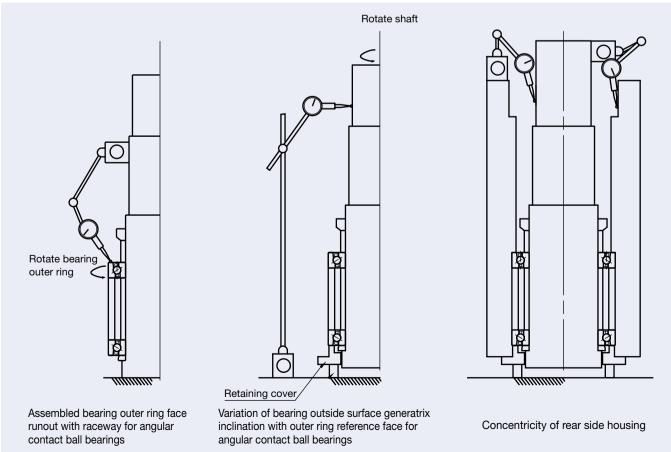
Runout Accuracy of Machine Tool Spindle
